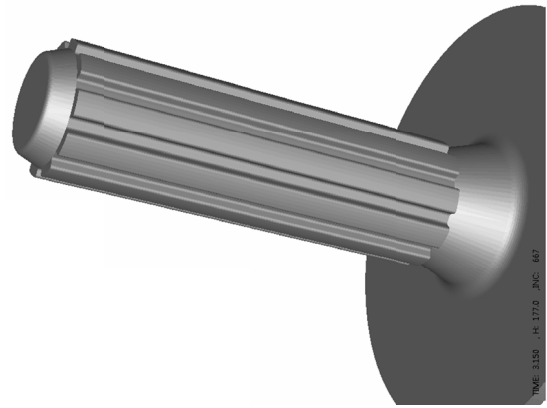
A model of the tool for forming the internal tothing of a flanged spline sleeve
